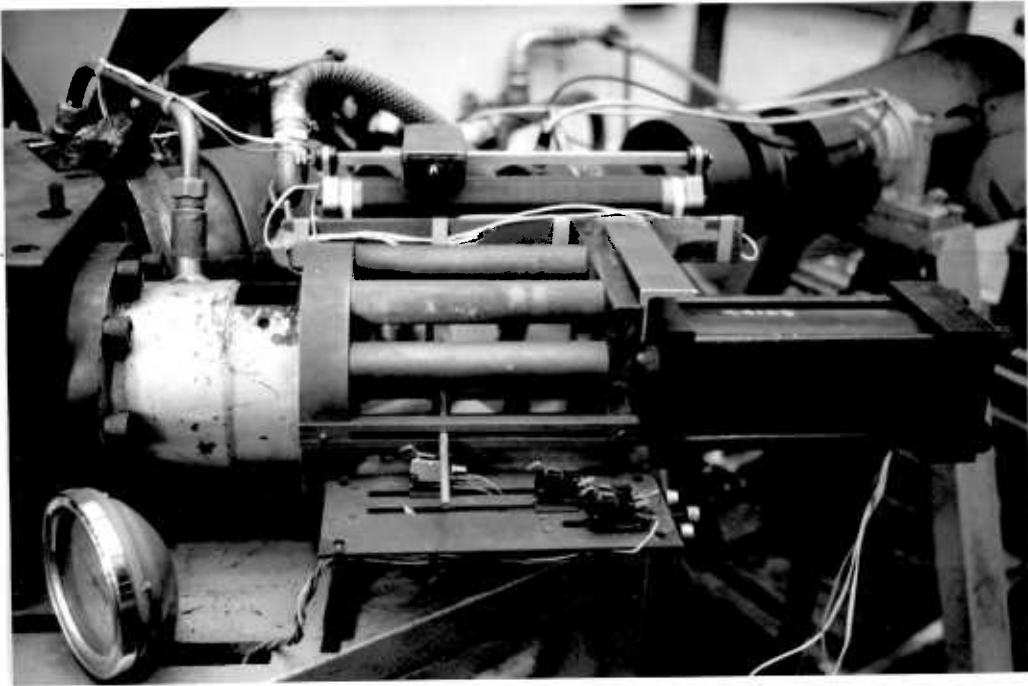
FEED CYLINDER, HYDRAULIC CYLINDER, MICROSWITCHES
